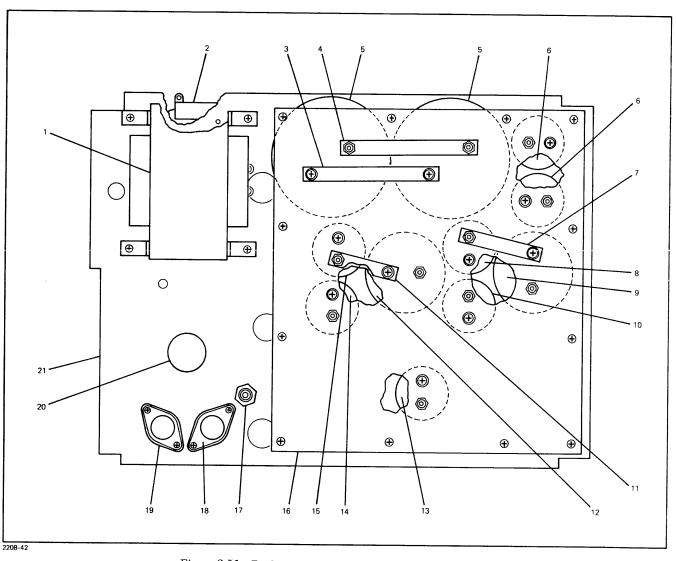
Deck Assembly (A8), Parts Location Diagram
